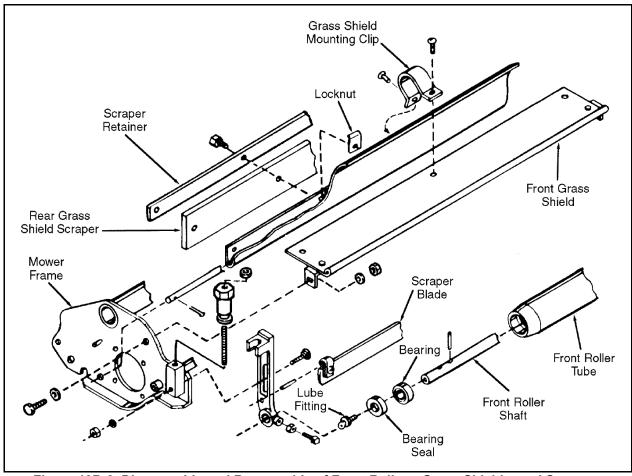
B-3. Disassembly and Reassembly of Front Rollers, Grass Shields, and Scrapers
